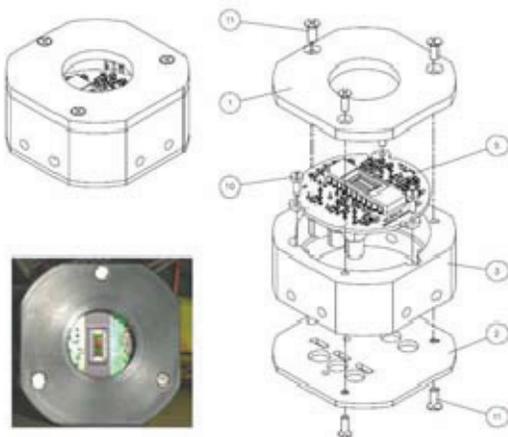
Exploded view and first prototype of the new matching detector using the S11105 linear CMOS chip.
